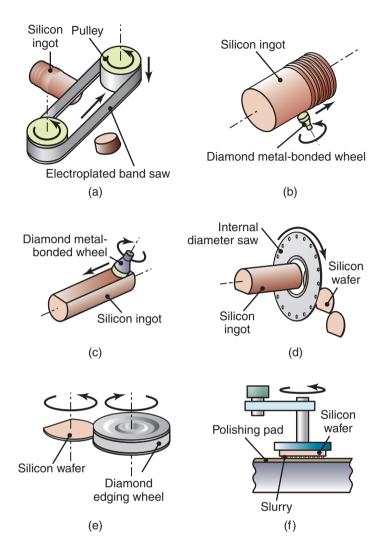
Finishing operations on a silicon ingot to produce wafers: (a) sawing the ends off the ingot; (b) grinding of the end and cylindrical surfaces of a silicon ingot; (c) machining of a notch or flat; (d) slicing of wafers; (e) end grinding of wafers; (f) chemical–mechanical polishing of wafers.
